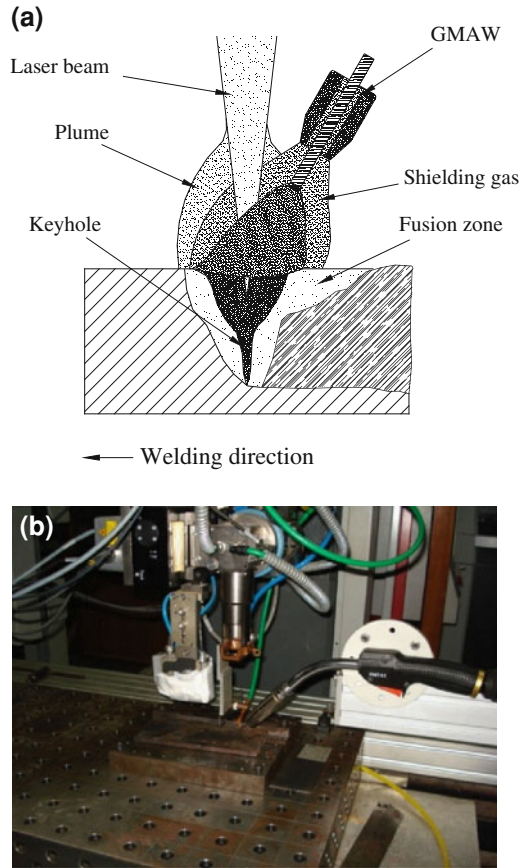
Laser-GMAW hybrid welding. a Schematic, and b actual arrangement of CO₂ laser beam welding head with a GMAW torch
